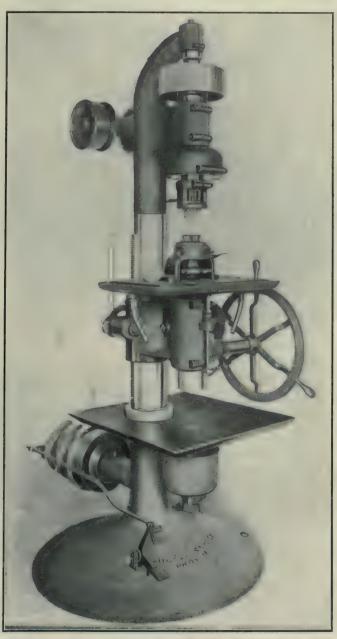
Multiple Drilling Machine, Raising Tuble Type.
